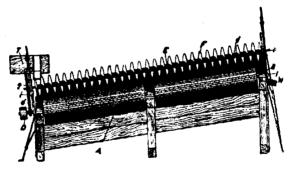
Longitudinal view of the machine with cover removed, showing arrangement of drum and feed screw.
